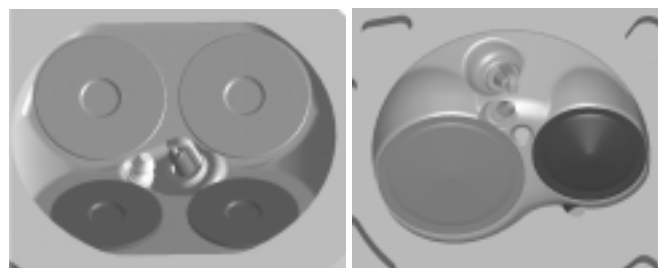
Typical 4-stroke combustion chamber configurations with air-assist, spray guided DI combustion system (2 valve and 4 valve examples)
